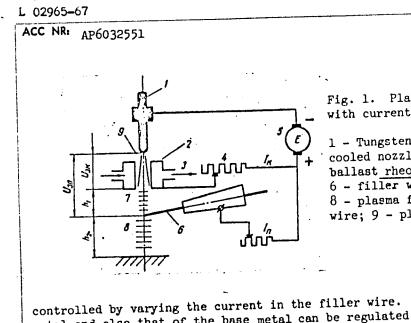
Plasma-arc metal deposition with current-carrying filler wire
